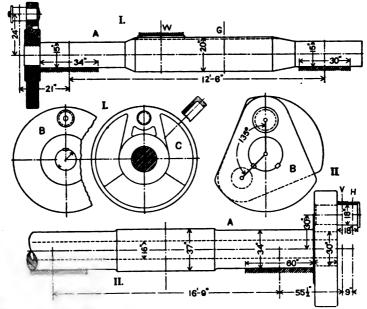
Shafts with Built-up End-cranks. I. For 26" by 48" Corliss engine, Figs. 213, 241, scale 1 to 48; II. For engine in Fig. 219, scale 1 to 72.
